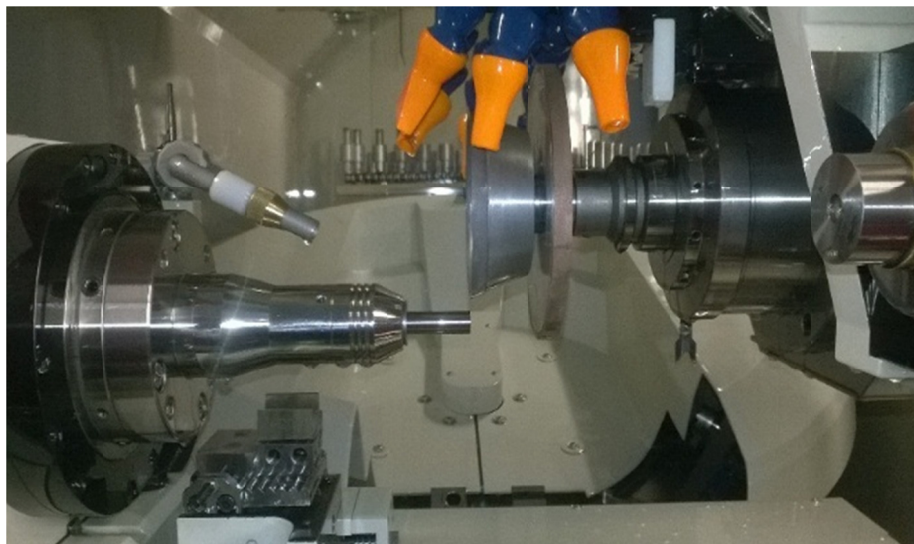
Shaping tools by grinding on CNC machine to implement the FSW process
